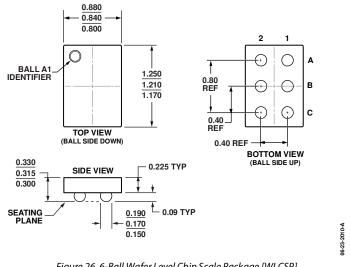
6-Ball Wafer Level Chip Scale Package [WLCSP] (CB-6-11) Dimensions shown in millimeters
